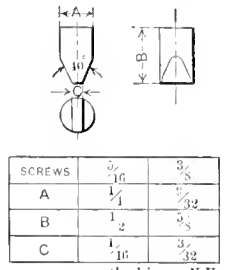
Dimensions of Shoes or Binders for Sliding Points.
